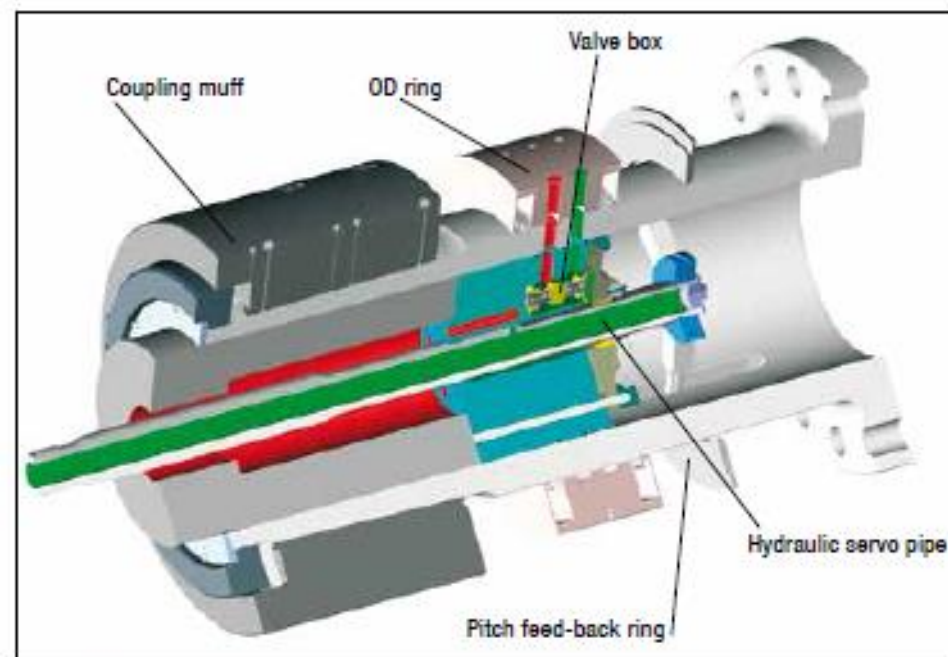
ODS type - OD box with coupling flange and pitch feed-back ring
